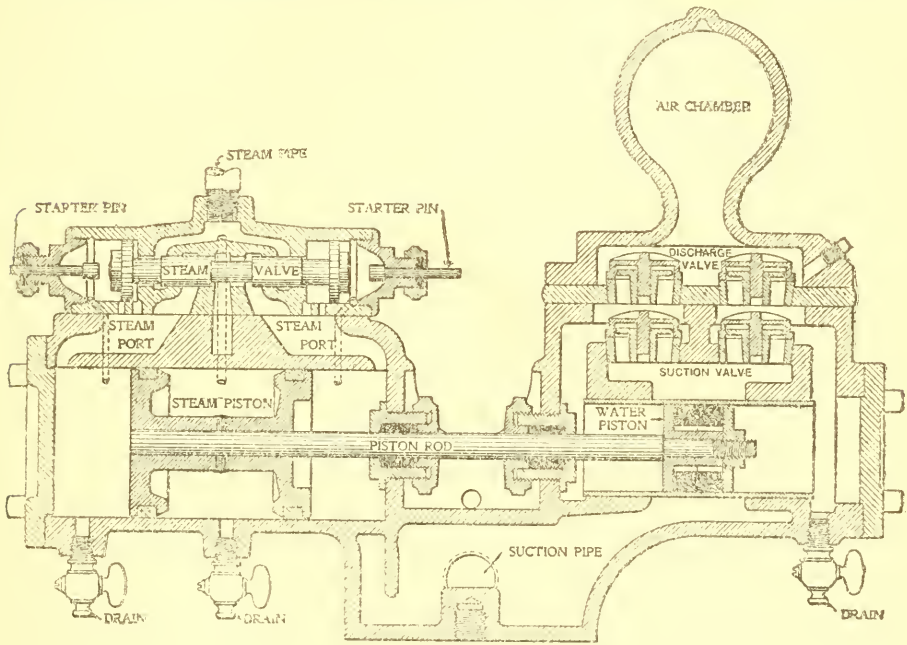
SECTIONAL VIEW OF MARSH PUMP.
